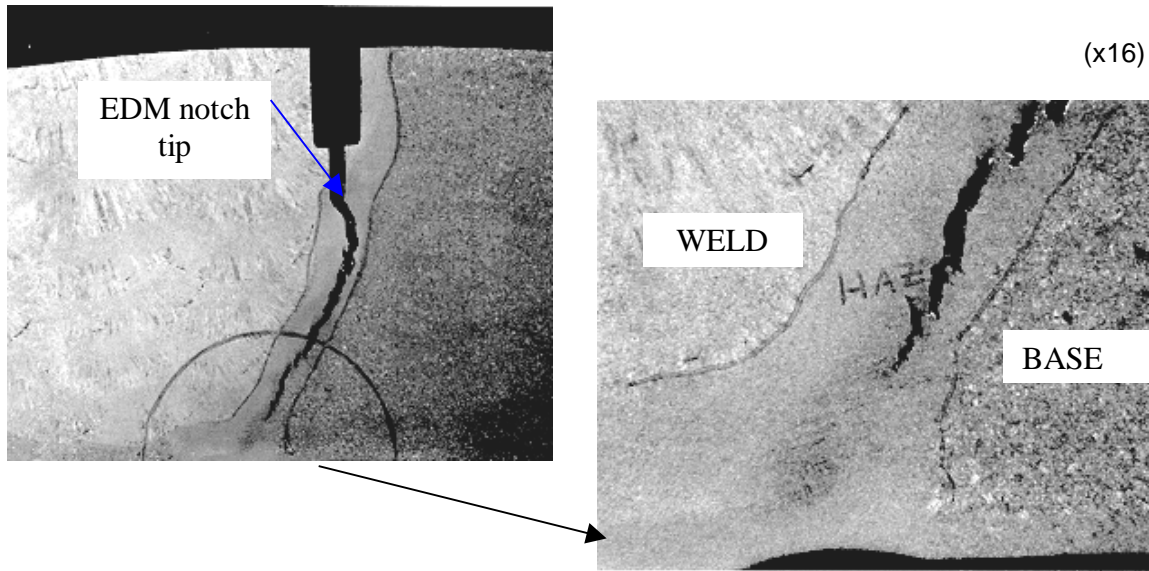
Seam welded pipe test – crack growth through the pipe wall thickness
